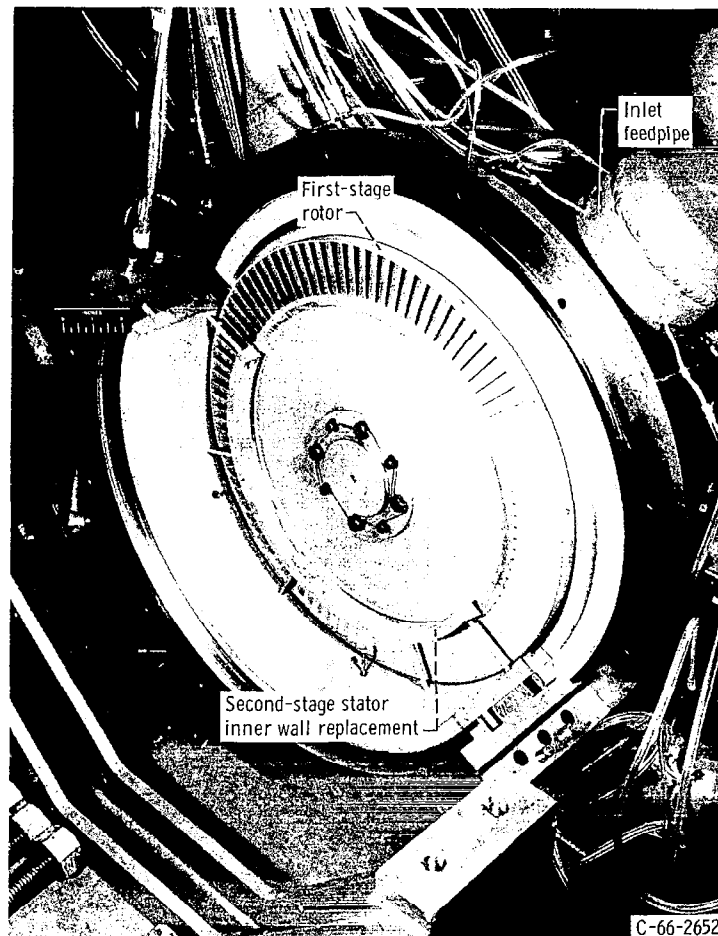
Turbine assembly with part of casing removed (upstream view).
